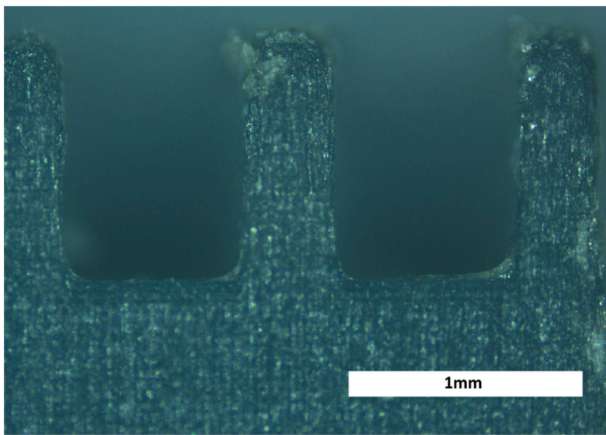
Optical image of the AR = 2 3D printed specimens pre-assembly.
